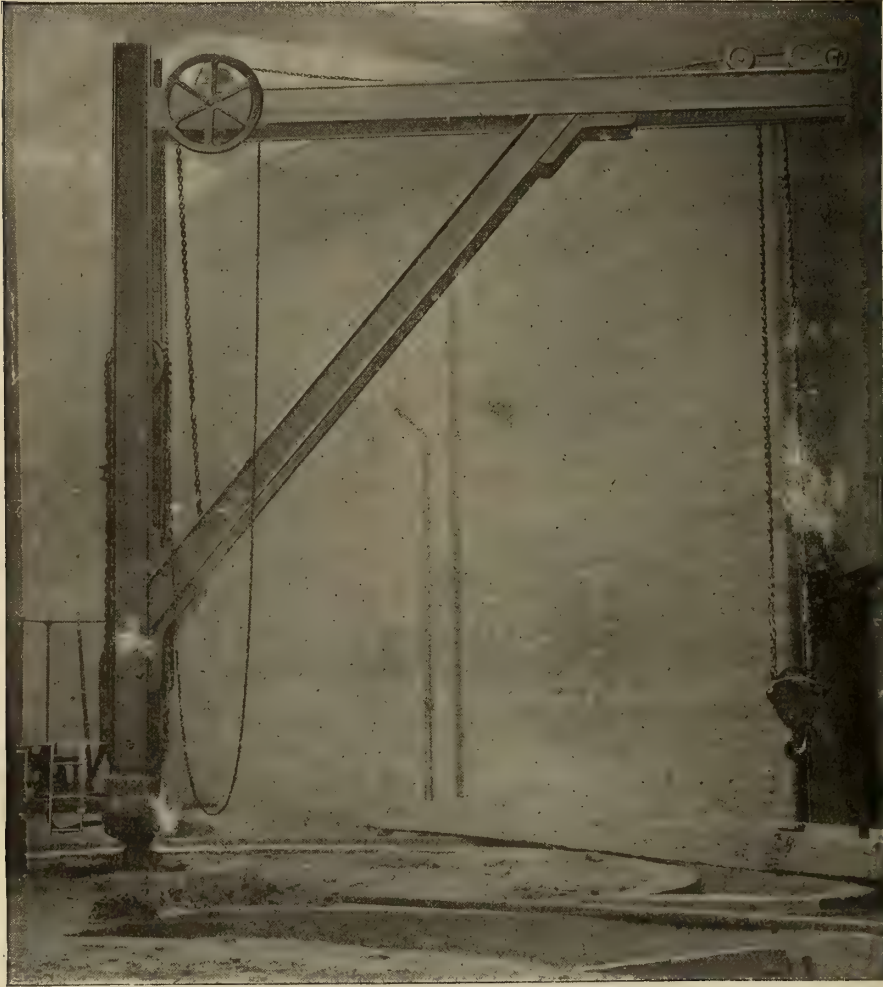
A SMALL FOUNDRY CRANE WITH HAND TRAVERSING GEAR.
